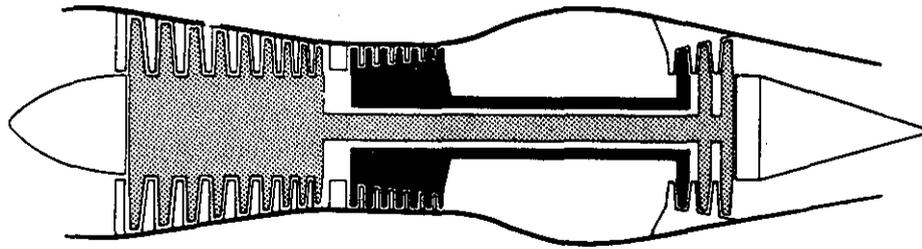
Dual-rotor turbine for split-spool compressor.
